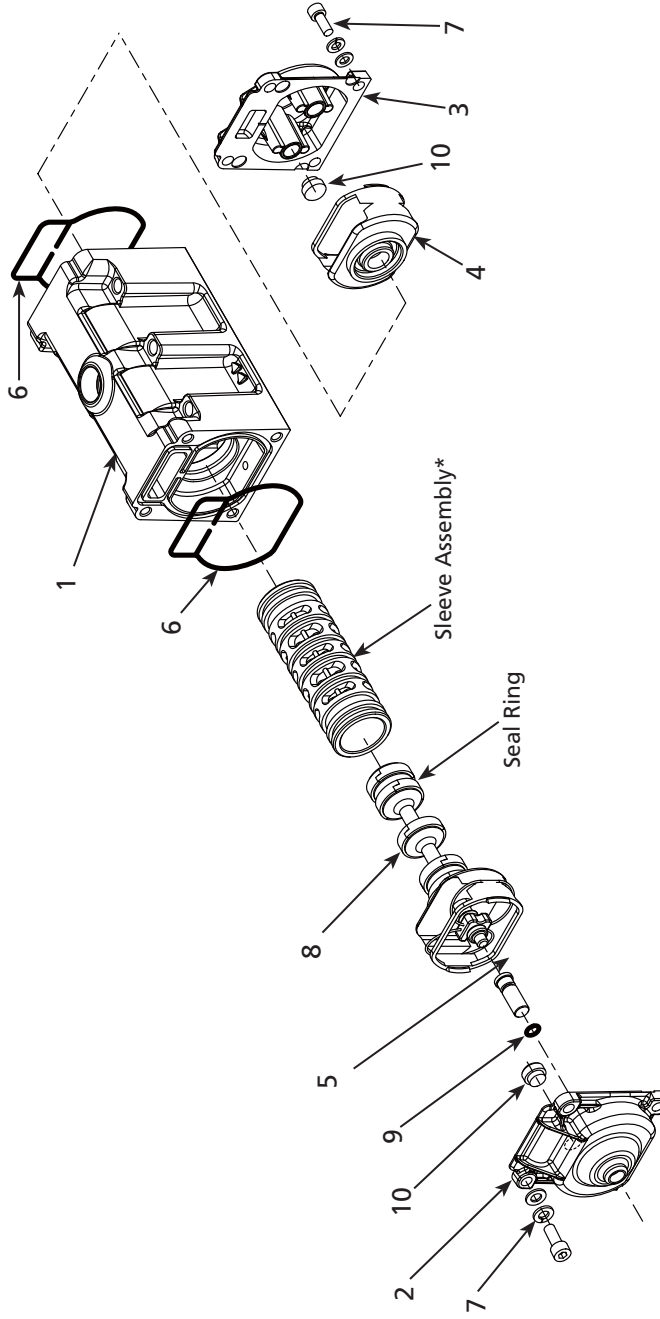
Repair Parts Illustration for Air Valve Assembly
